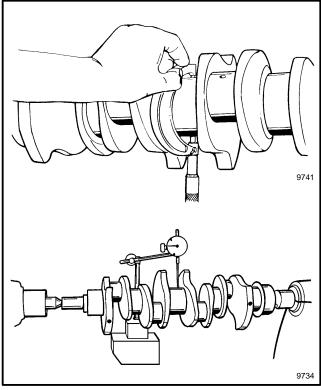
CRANKSHAFT INSPECTION
